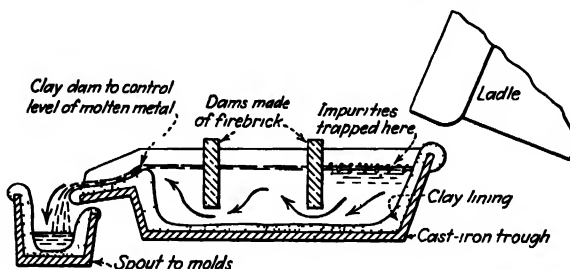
POURING TROUGH FOR SKIMMING ON PIG MACHINE.
